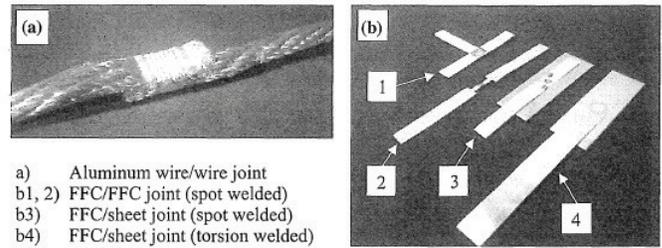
Wire, Cable, and FFC Joints<sup>5</sup>
